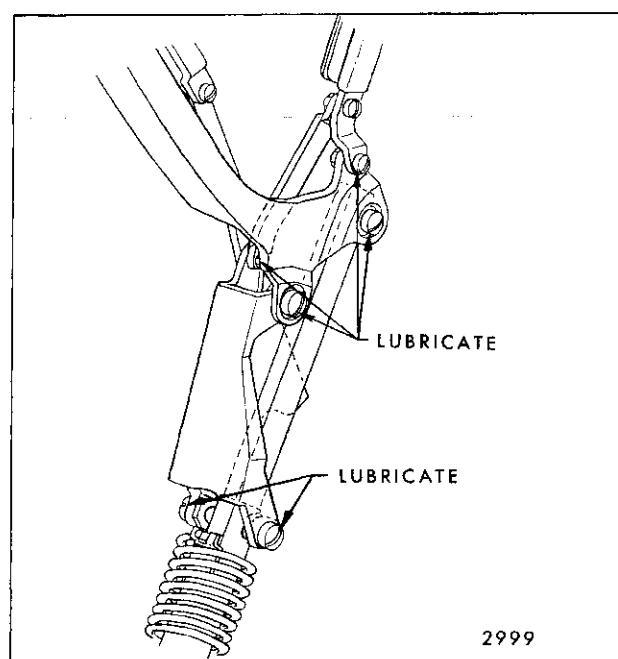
Convertible Top Hinge - "A" Body Styles
